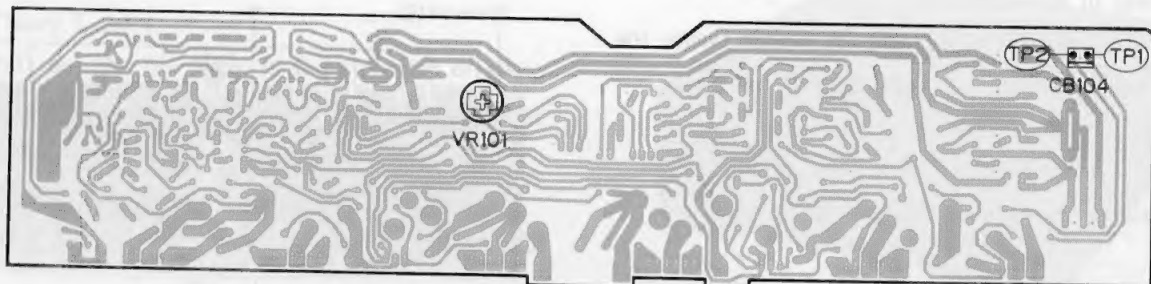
Main-Amp(L) P.C. Board (Component Side)
